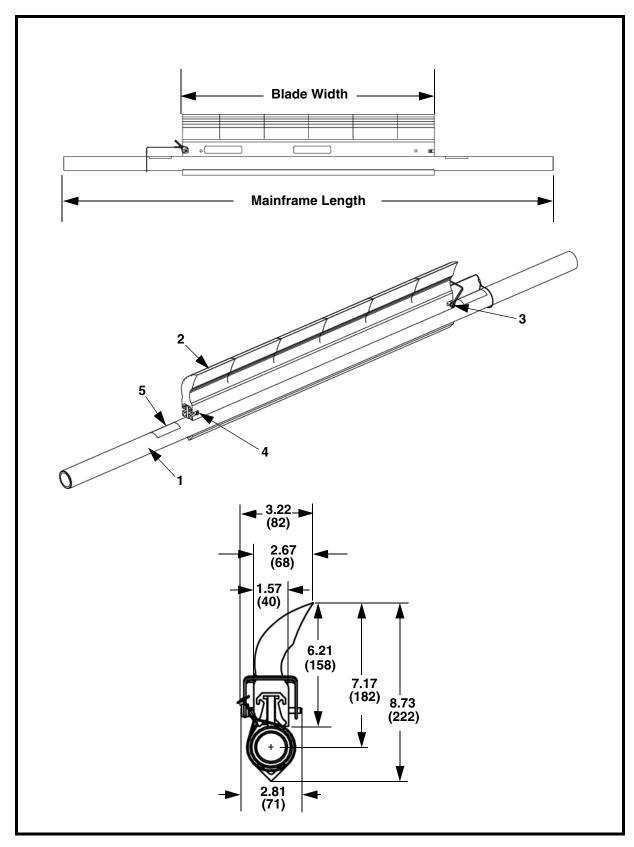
Martin $^{\circledR}$ PV Cleaner Assembly, P/N PV1S-XXXXXXXXXXXXX
